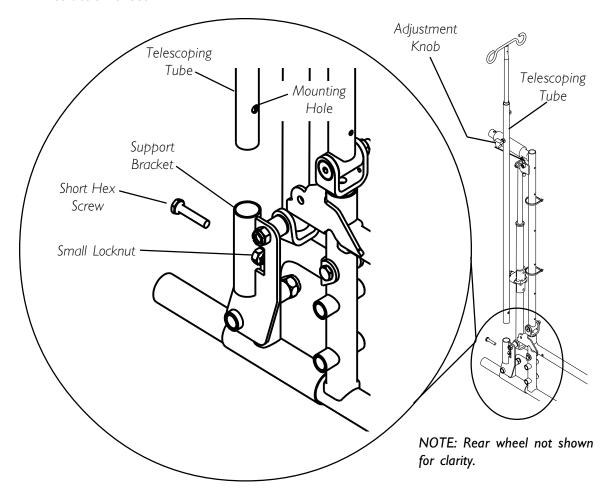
INSTALLING THE TELESCOPING TUBE/ADJUSTING THE I.V. ROD HEIGHT
